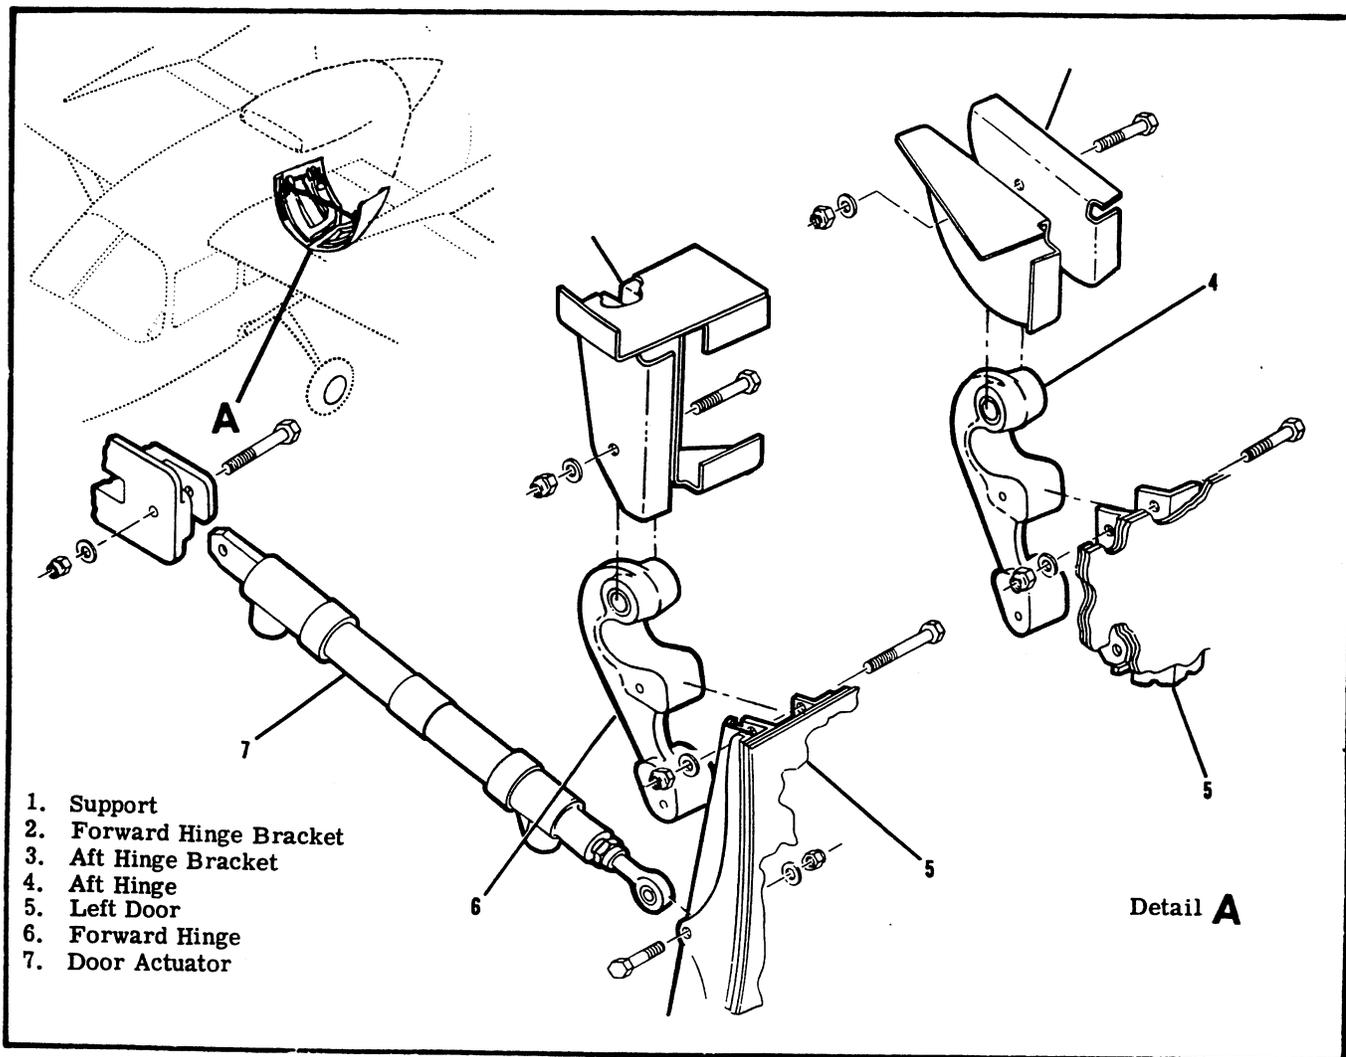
Main Gear Doors Installation (Sheet 2 of 2)
